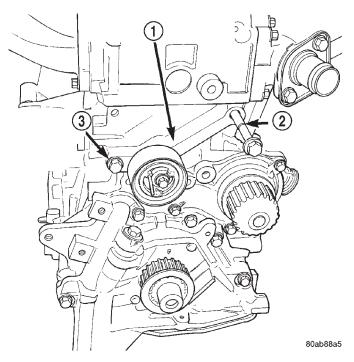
Timing Belt Tensioner Assembly—Removal/ Installation
